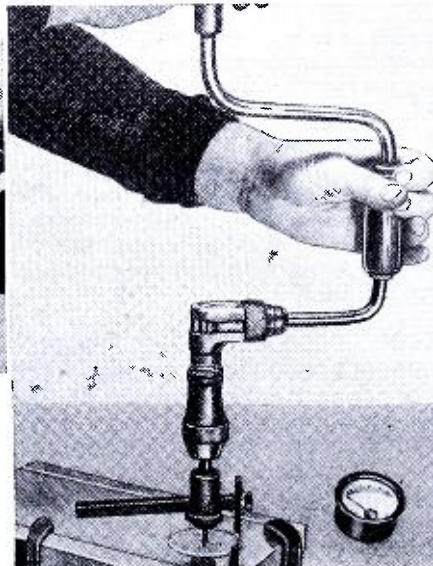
(center) How to mount and brace a panel when drilling large holes for meters, etc. Keep the brace straight and turn it slowly to give the cutting tool a chance to "bite" into the metal.
